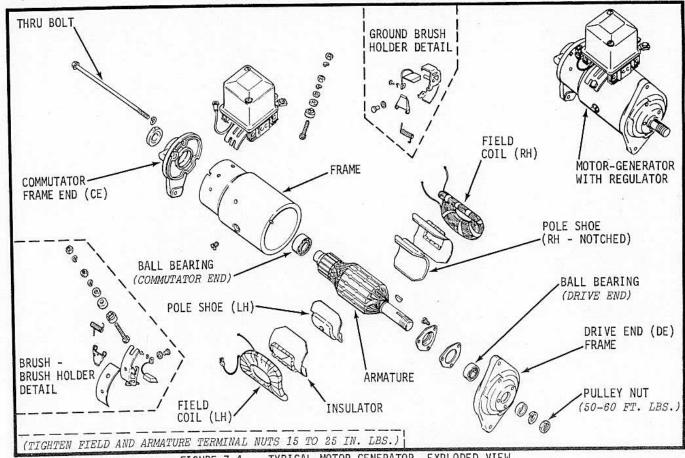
TYPICAL MOTOR-GENERATOR--EXPLODED VIEW
